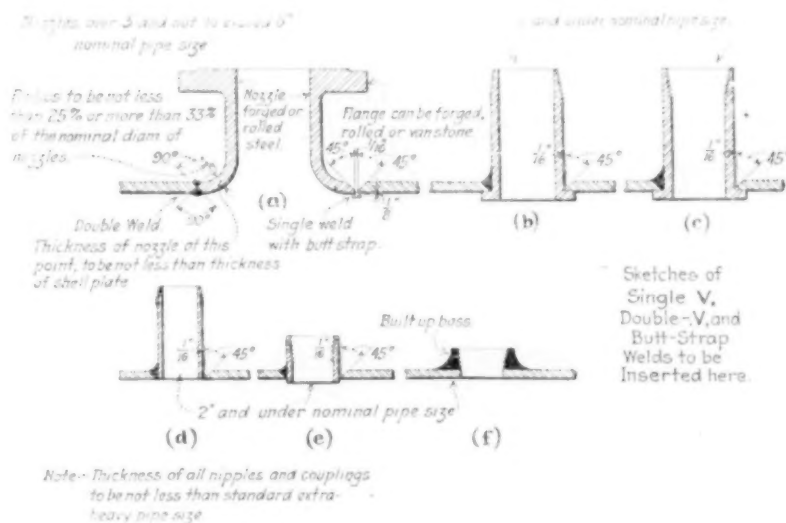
METHODS OF AUTOGENOUSLY WELDING NOZZLES
